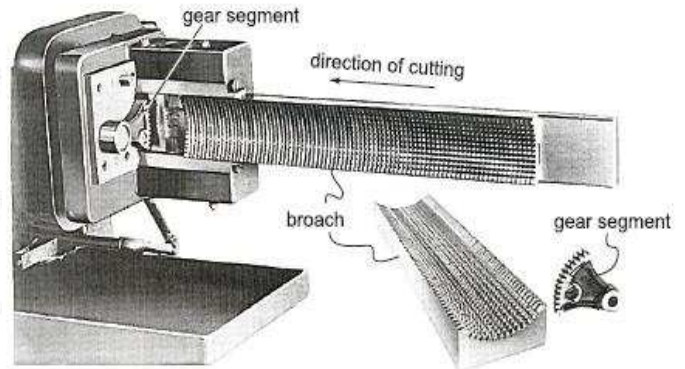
(b) Broaching the teeth of a gear segment by horizontal external broaching in one pass
